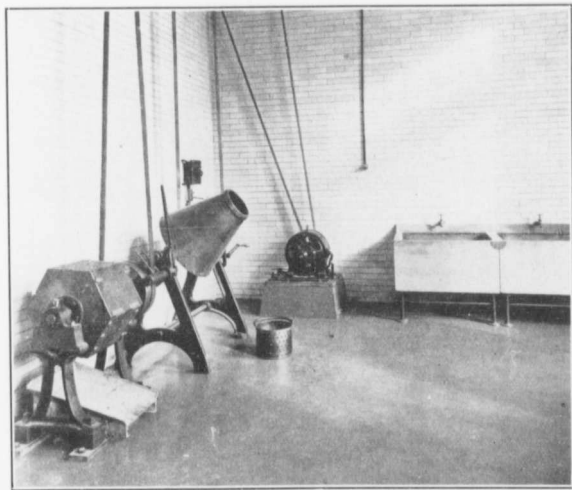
Tumbling barrel, drying drum, and washing tanks in Annealing Room.
